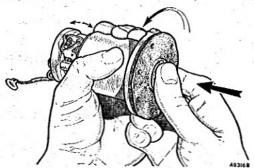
Setting the diaphragm. Unscrew until the rocker just 'throws over'
